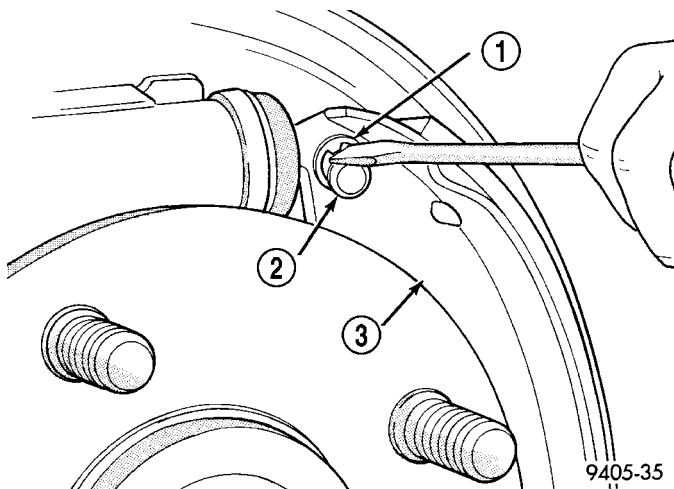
Parking Brake Lever Pin To Brake Shoe Retaining Clip
